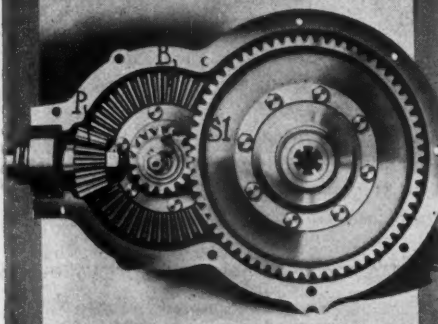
DOUBLE GEAR REDUCTION IN REAR AXLE OF THE STANDARD ELECTRIC CHASSIS
